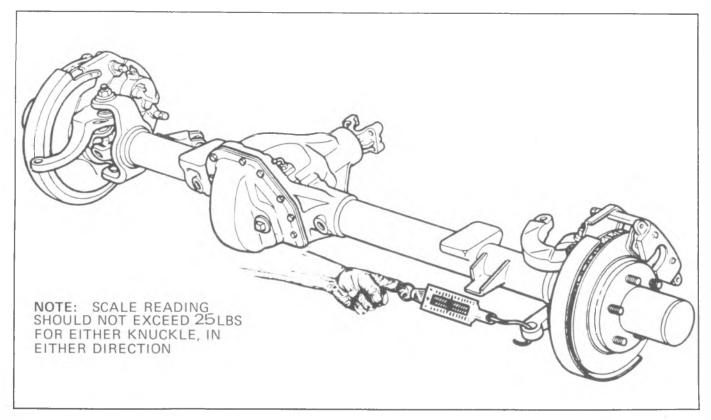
C-4K--Determining Front Axle Ball Joint Adjustment
